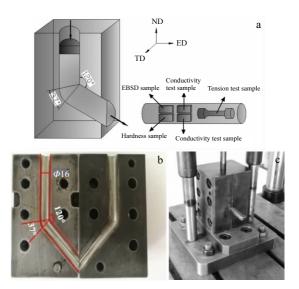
Principle of equal-channel angular pressing (a), die structure (b), and actual assembly drawing (c)
